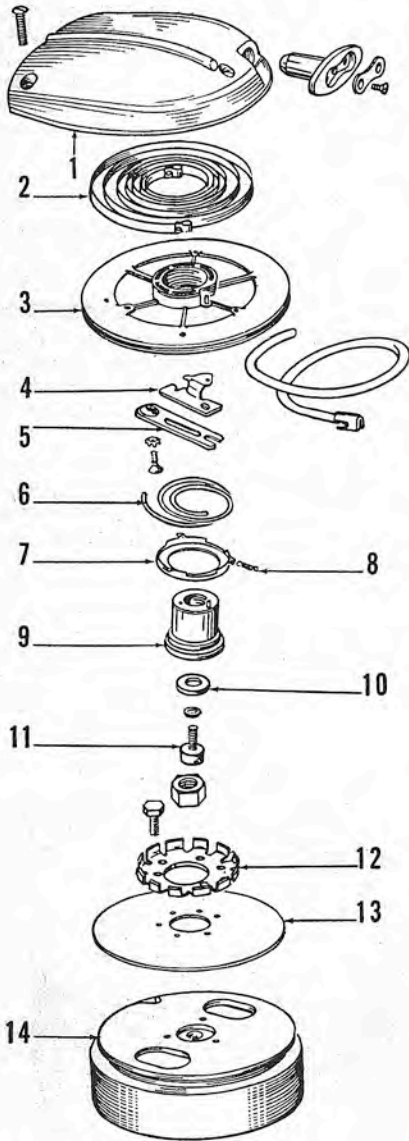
Exploded view of starter assembly used on early series JW motors, Except for housing (1), parts are similar for early CD and QD motors.
